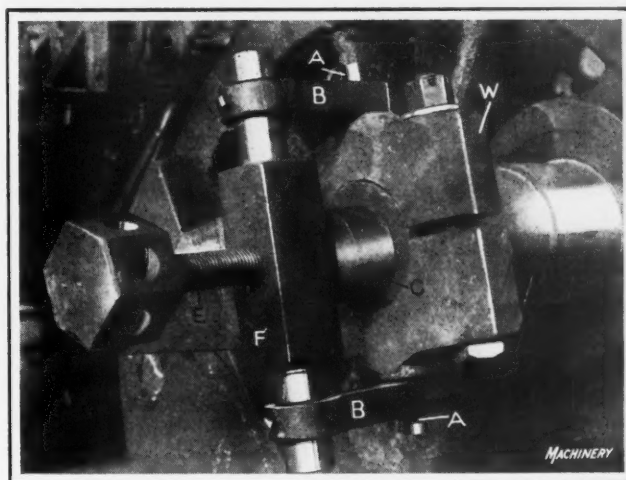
Pulling Device in Position for Removing Valve Eccentric Arm
